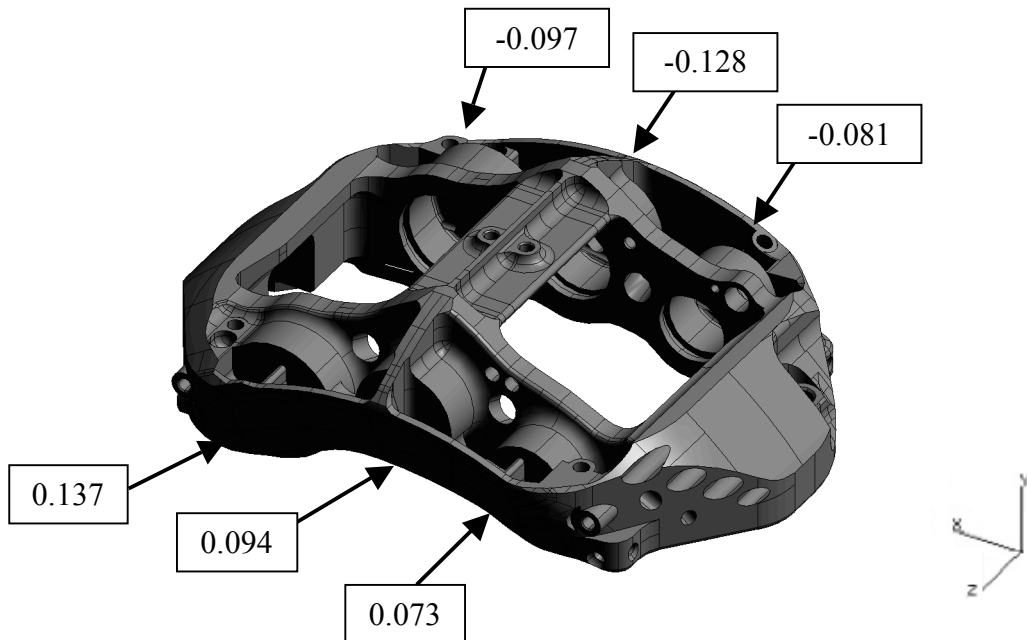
C8 caliper, piston bores displacement in the "z" direction (mm)
